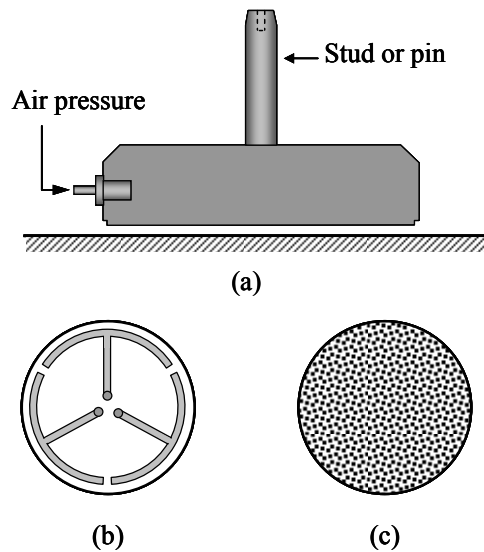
(a) Air bearing (side view), (b) Orifice air bearing (bottom view), and (c) Porous material air bearing (bottom view)
